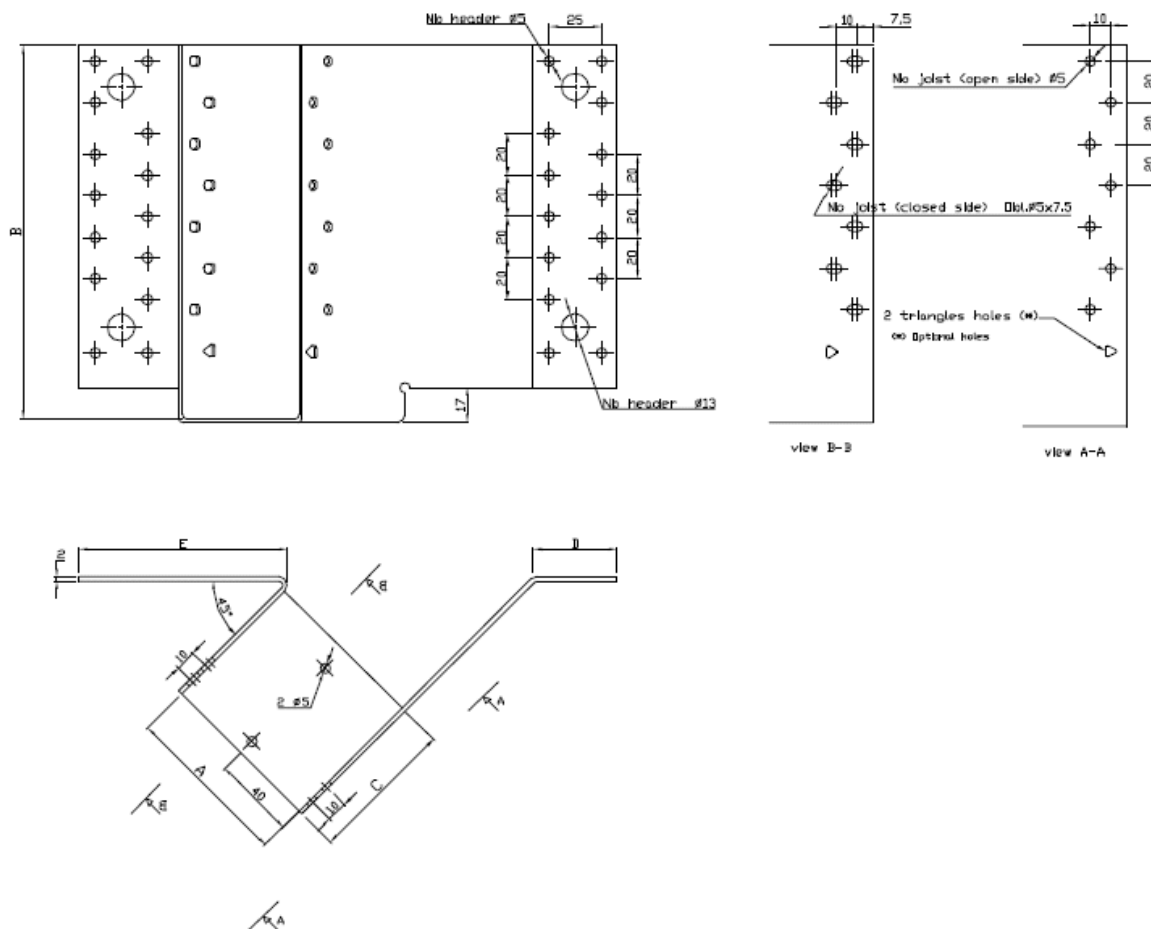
Dimensioned drawing of right skewed hangers S45
